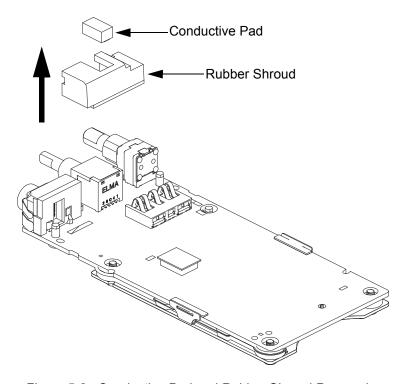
Conductive Pad and Rubber Shroud Removal
